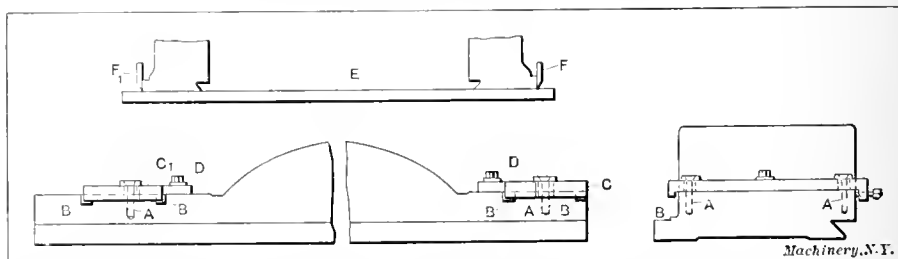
Jigs for Drilling Stud Holes in Back of Cross-rail. Setting of Jig *C* Endwise, is accomplished by transferring Measurement from Housings by Means of Wooden Straightedge *E
